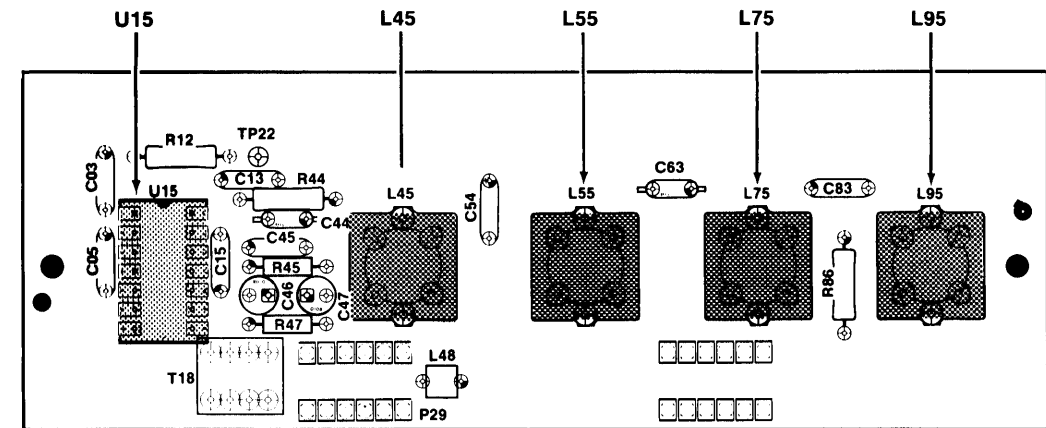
CIRCUIT BOARD ADJUSTMENTS AND JUMPER LOCATIONS.
